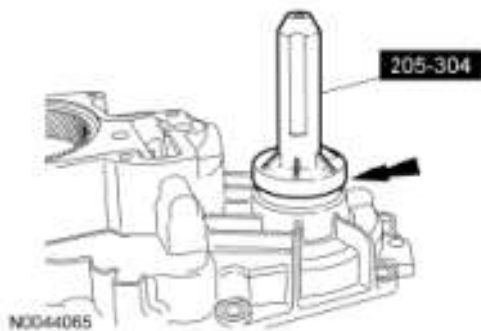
Installing Oil Seal Using Drive Pinion Oil Seal Installer
